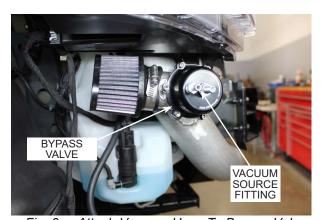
c: Attach Vacuum Hose To Bypass Valve
